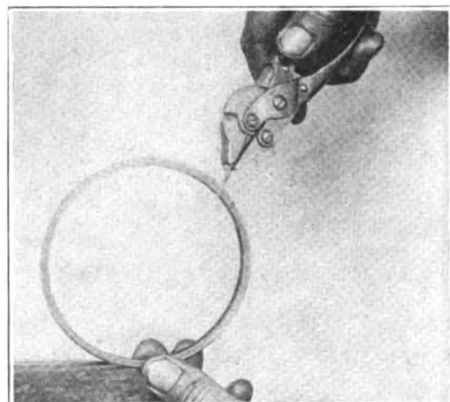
Ring Is Compressed and Held With Soft Wire.
